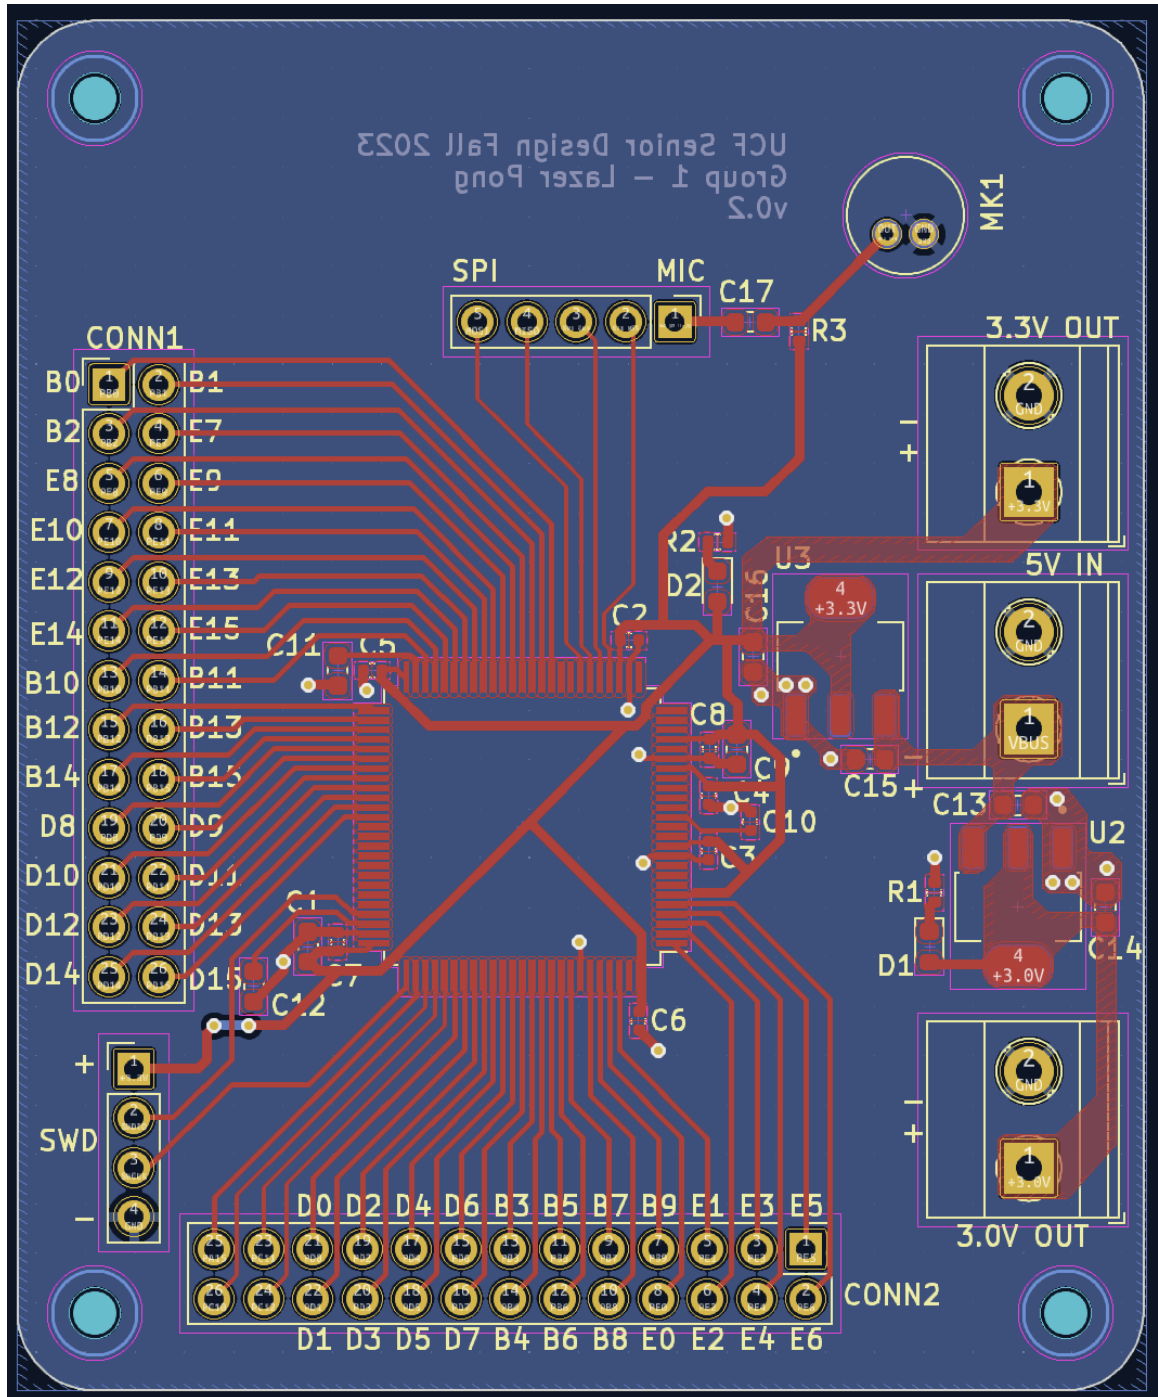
Fig. XX: PCB Design. Image provided by Lazer Pong project team.
